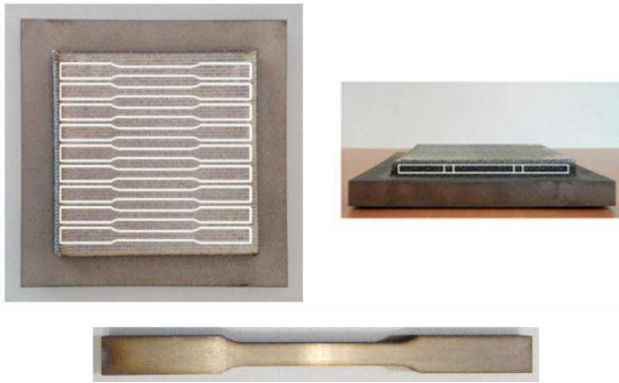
Wire-EDM cutting pattern in one of the Ti10Ta blocks produced by LASER cladding. Acut specimen is also shown.
